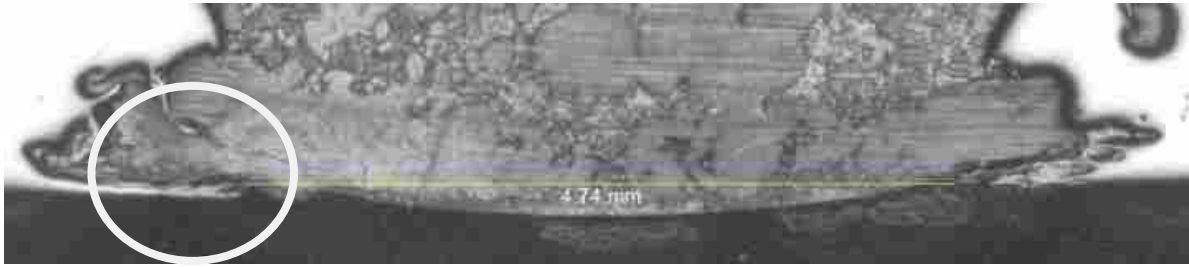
Micro-Cracks in Sectioned Weld
